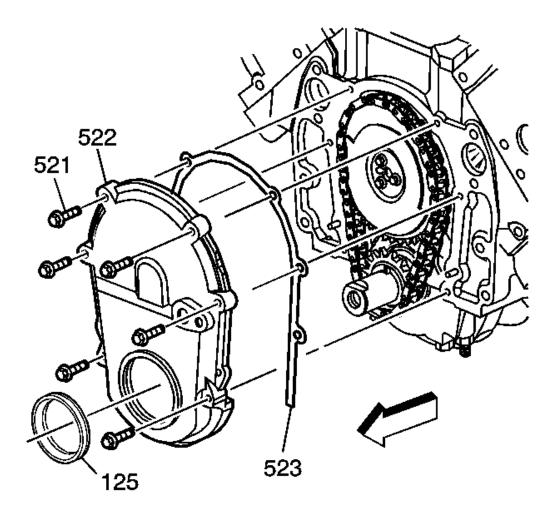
View Of Engine Front Cover, Bolts, Gasket & Crankshaft Front Oil Seal Courtesy of GENERAL MOTORS CORP.
